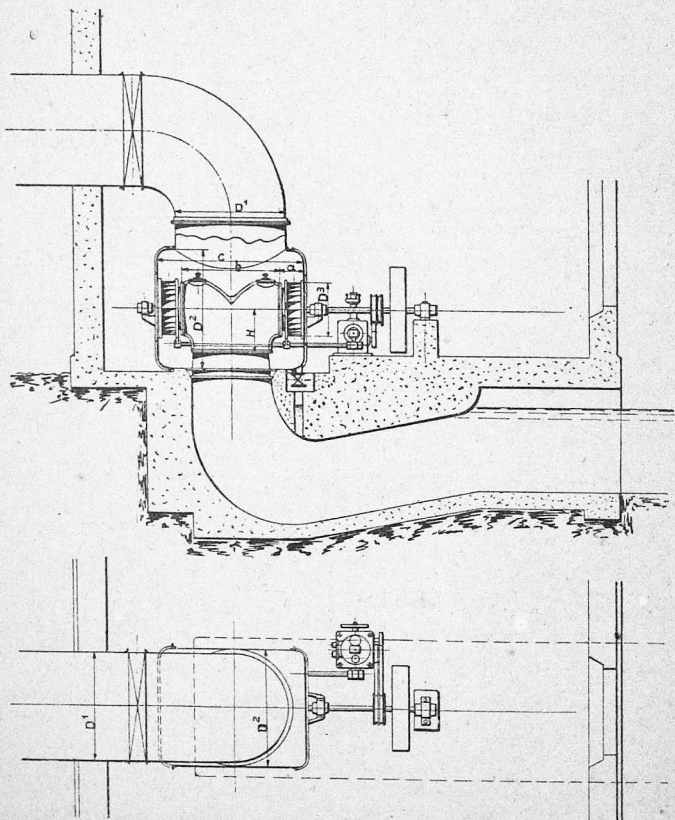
DOUBLE FRANCIS TURBINE, HORIZONTAL SHAFT AND CYLINDRICAL CASING.
